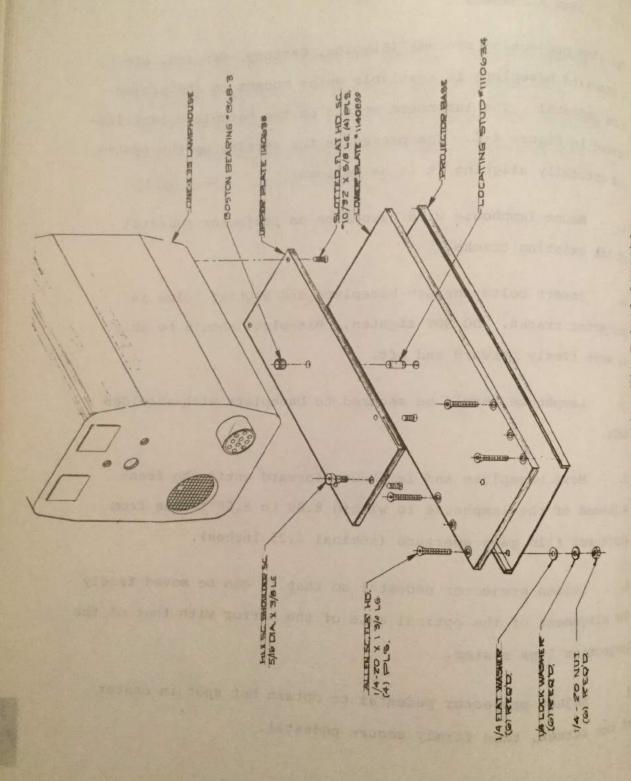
35mm Mounting Kit Swivel Assembly
